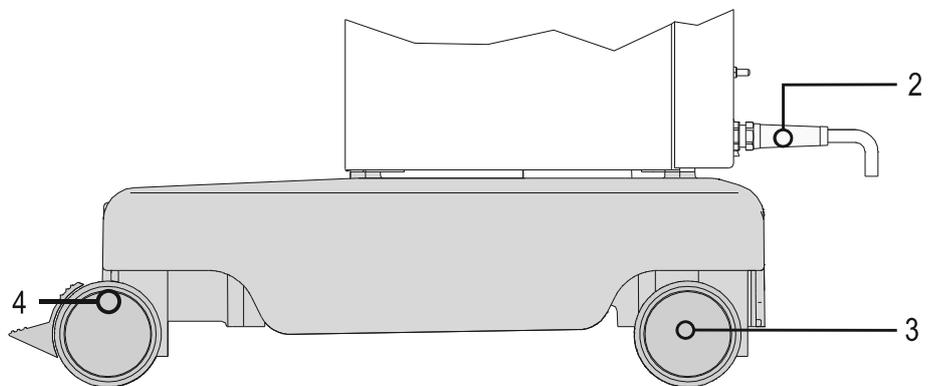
Base Platform, 2 Swivel Caster with Brake, Side View
